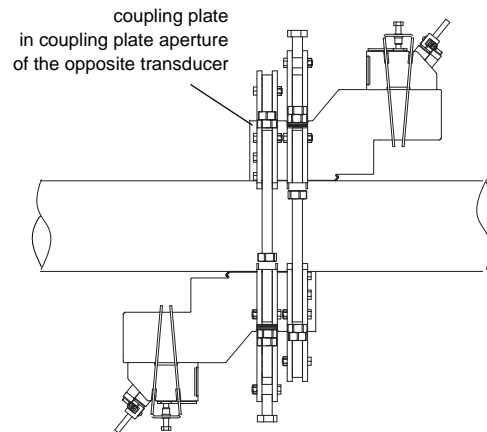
Fixing the coupling plate to the pipe mounting fixture of the opposite transducer (only in diagonal arrangement)
